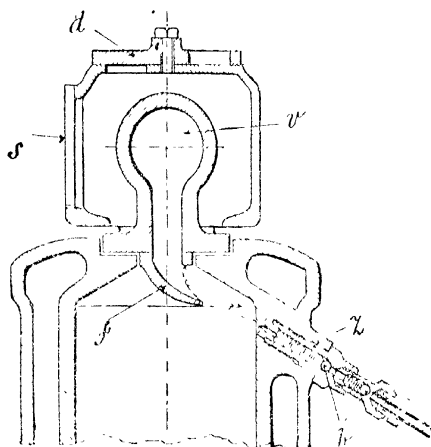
Sectional elevation of the Cudell two-stroke bulb-vaporiser injection oil engine
